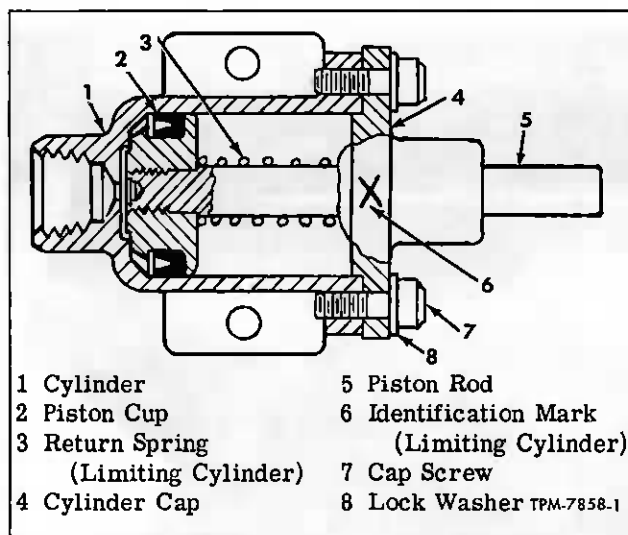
Engine Stop and Fast Idle Limiting Air Cylinder
